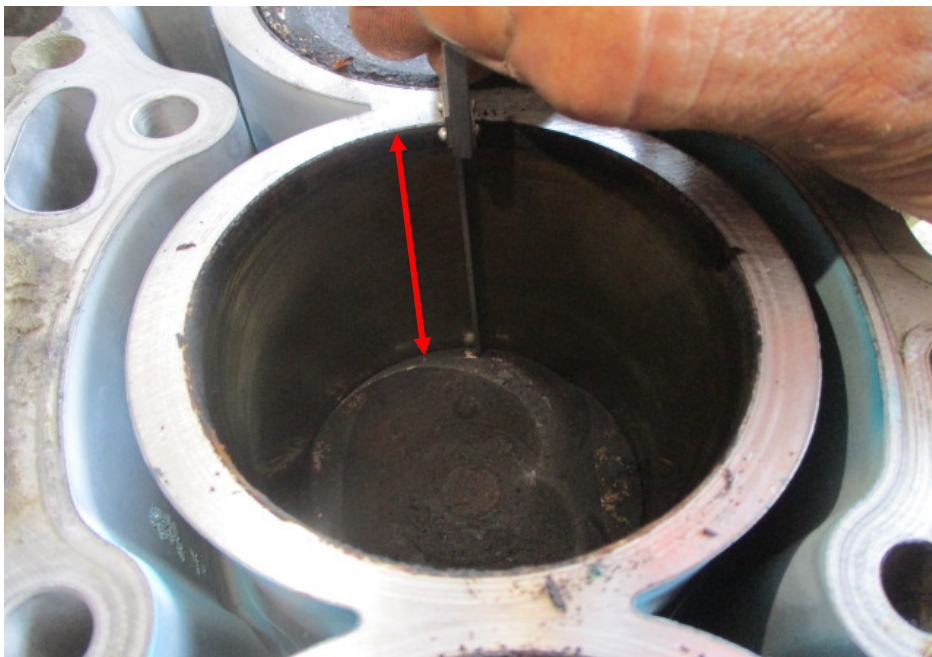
shows measurement being carried out to the bore (arrowed) of cylinder 2 of the Toyota engine. The bore measurement of cylinder 2 was recorded to be 85.67mm.
